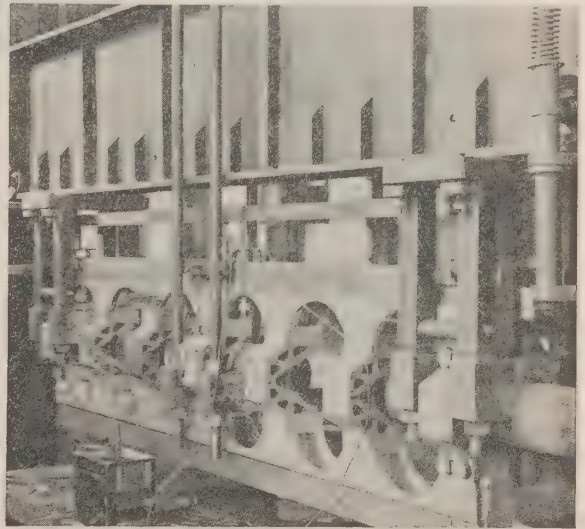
ANALYSIS ON MODEL OF WELDED ENGINE BED (Stresses under lateral load can be read from the strain gages visible in the illustration.)
